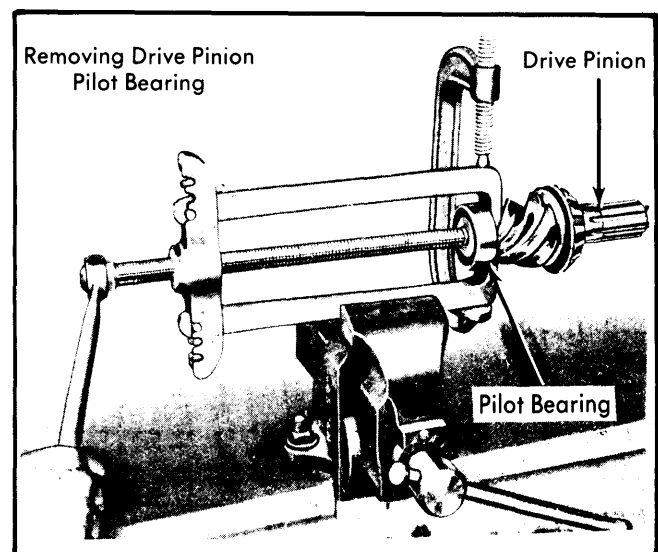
Drive Pinion Pilot Bearing Removal With Puller
